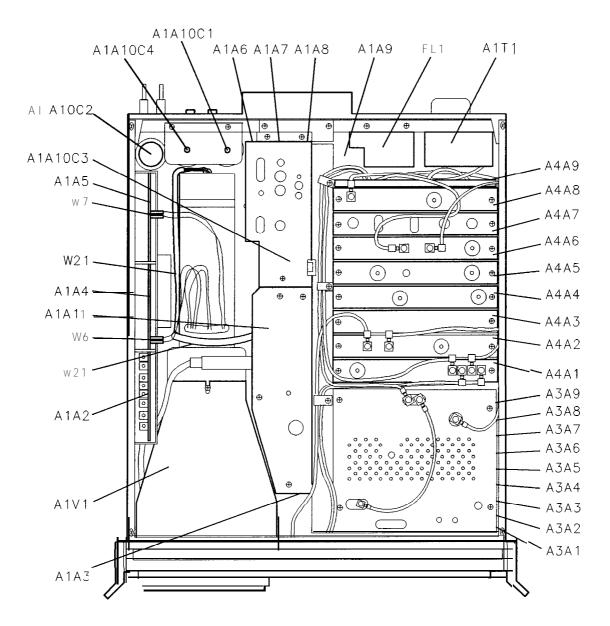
IF Section, Top View (SN 3001A and Below)
